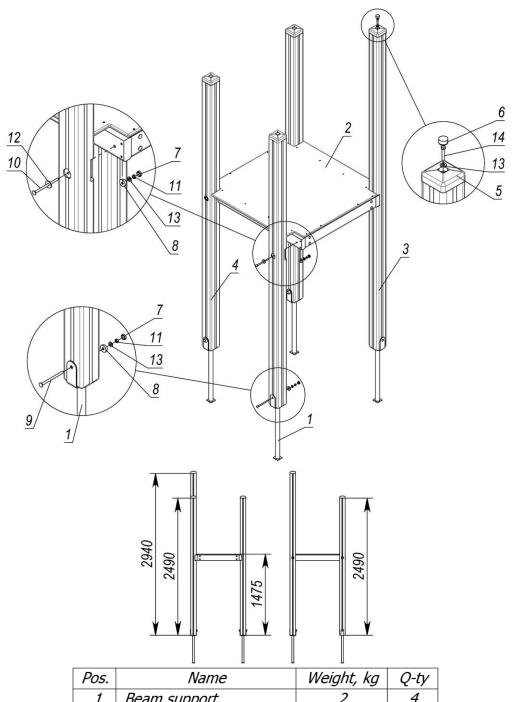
Completeness and assembly scheme of central tower. Marked under №1 in the picture 27.
